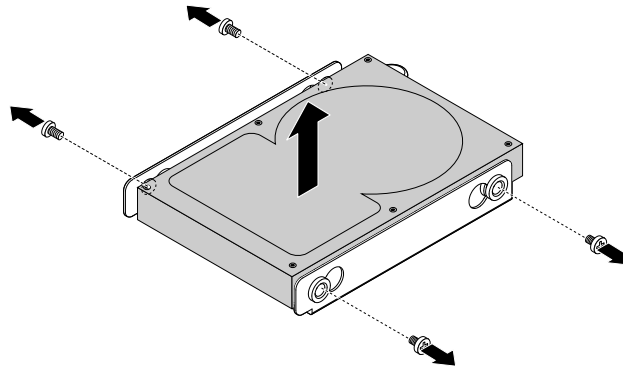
Removing the 2.5-inch hard disk drive from the bracket
